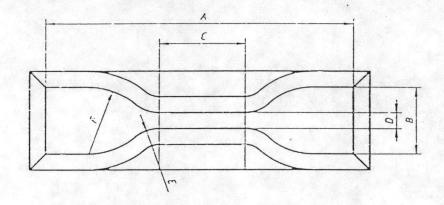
Dimensions of dies for dumb-bell test pieces
